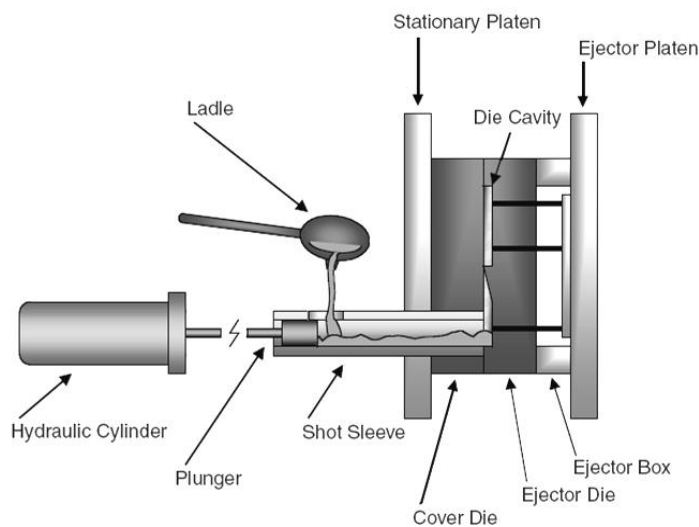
Graphical illustration of a cold-chamber die casting machine [3].
